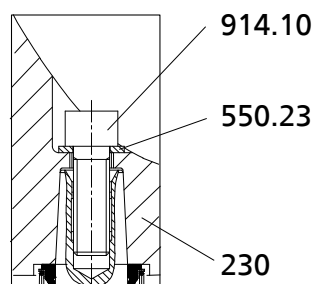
Fitting impeller with tapered interference fit on pumps with bearing brackets S05/S06
